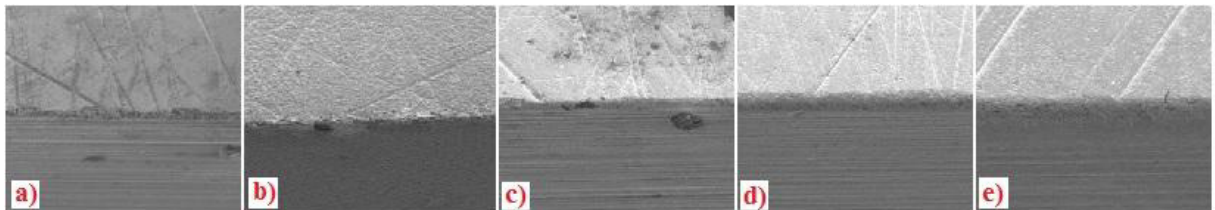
Cutting edge prepared by: a) grinding, b) laser technology to edge radius 5µm and drag finishing to edge radius c) 5µm, d) 10µm and e) 15µm (500x zoom).
